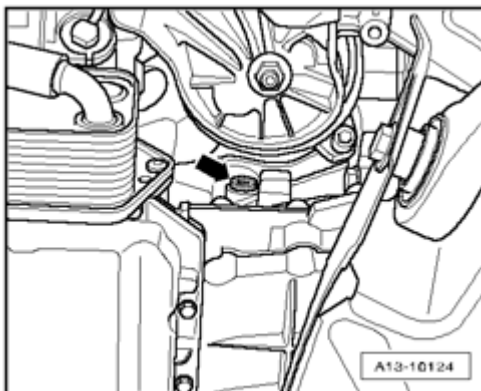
Removing/Installing Sealing Plug From Cylinder Block
